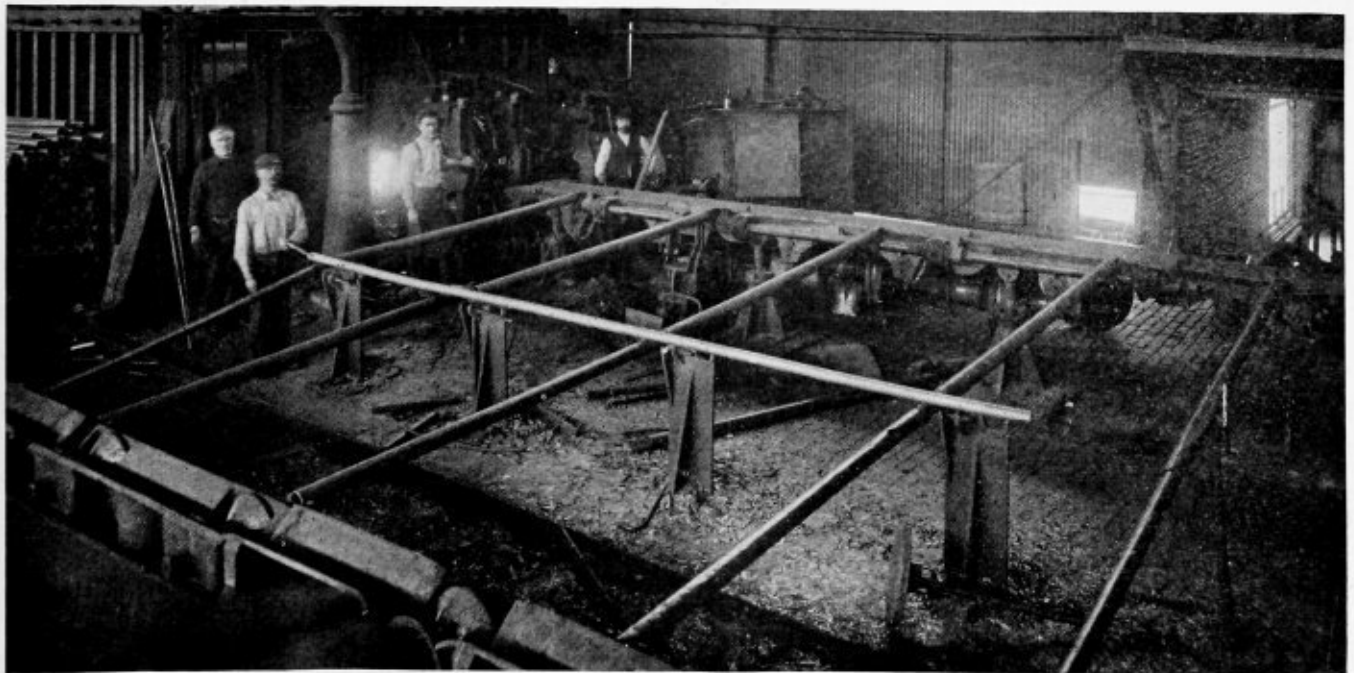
Welding the Tube Over a Mandrel Held on the End of a Rod Between Rolls
